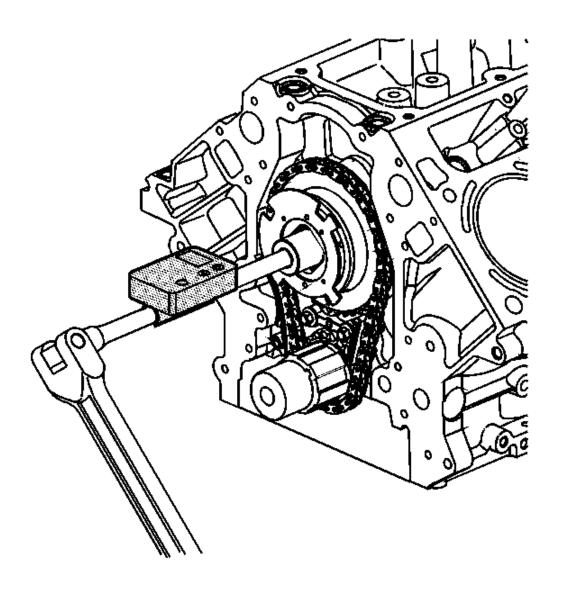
Tightening CMP Actuator Solenoid Valve Courtesy of GENERAL MOTORS CORP.
